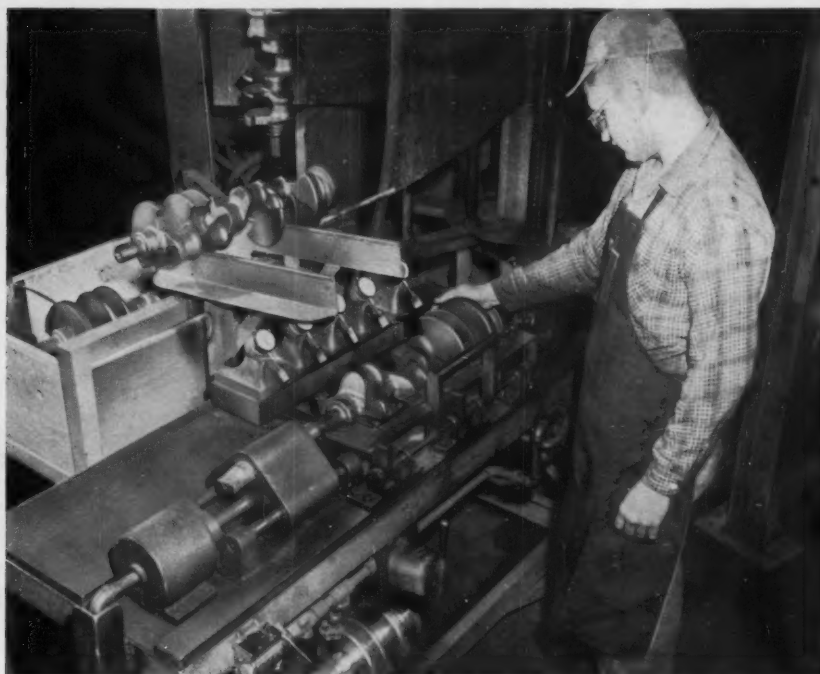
The throws of the crankshaft are inspected for clearance and runout by means of a row of dial-indicator paddle gages.
